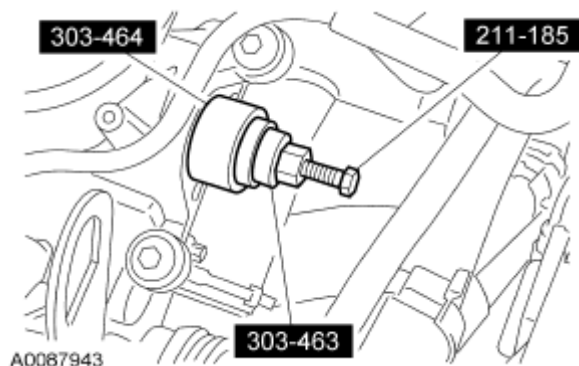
Installing Camshaft Oil Seal Using Special Tools (303-463, 303-464, 211-185)
